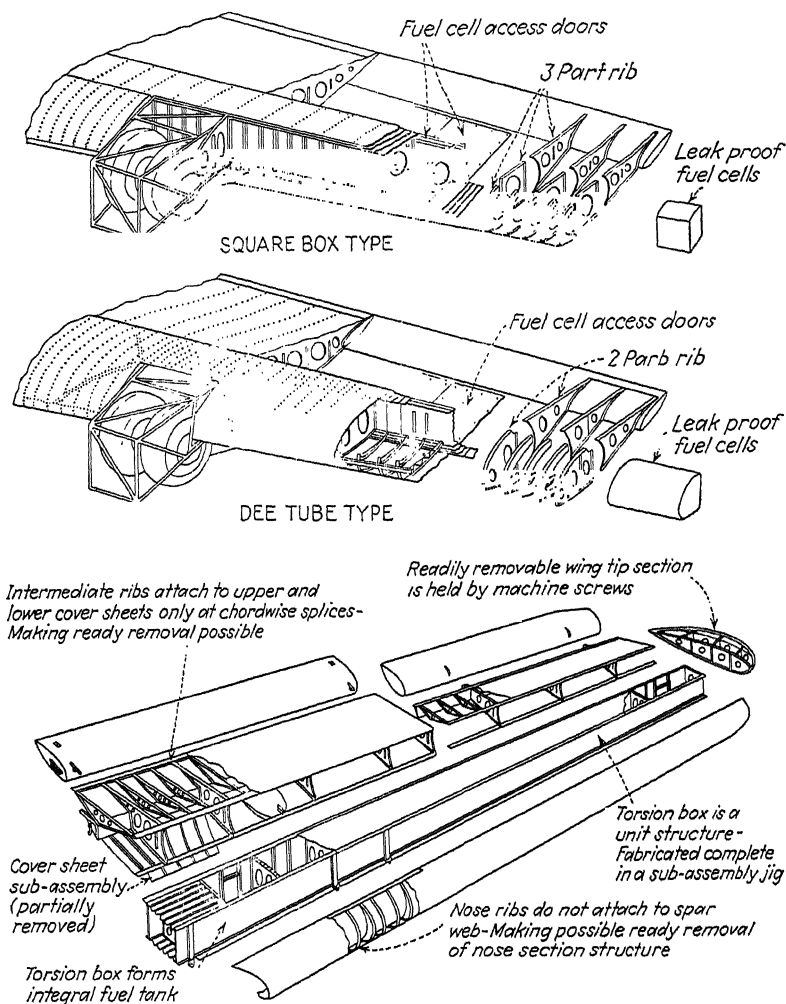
Three types of cantilever box-beam stressed-skin wings.
